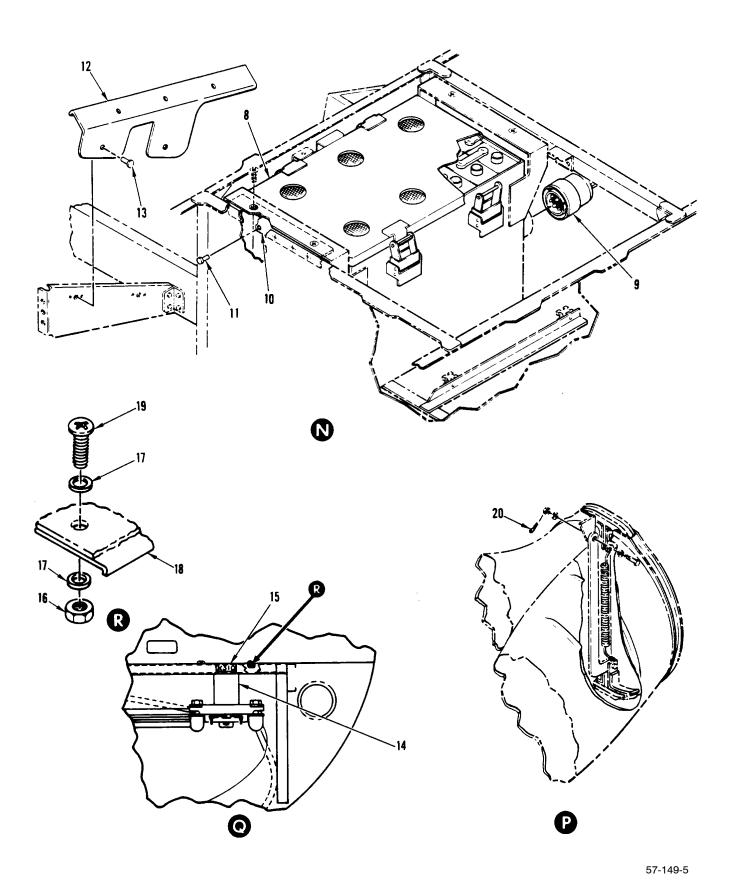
250-C20R/2 Engine installation Kit (Sheet 2 of 2)
